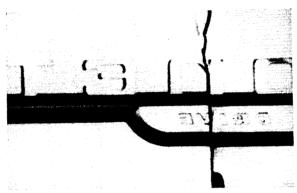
Section of a die that cracked in two pieces. There is another fine crack directly below the letters, but this is not visible.
